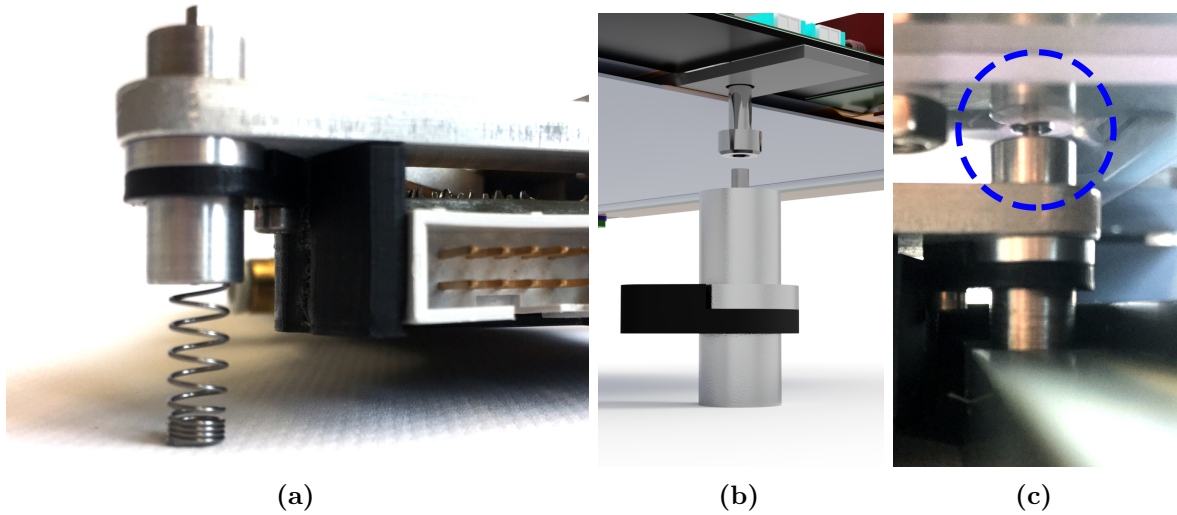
Bottom KIRA twin board alignment principle. (a) The twin board is placed onto spiral springs protruding from the test station fixture. (b) By adjusting the position of the fixture corner plates, it is possible to reach a precise alignment between the 1.5 mm pins in the twin board circular standoffs and the M2 Allen screws in the 2S module carrier. (c) Successful alignment of the bottom twin board with the carrier. [Bra20]
